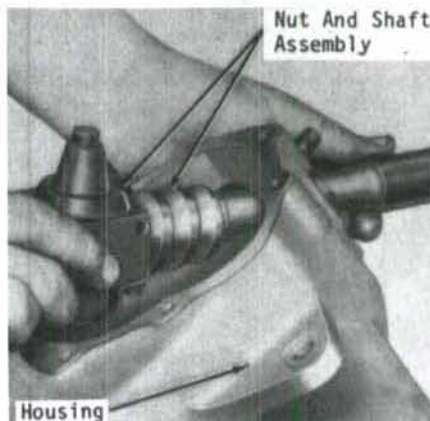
Removing ball nut and steering shaft assembly from gear housing.
